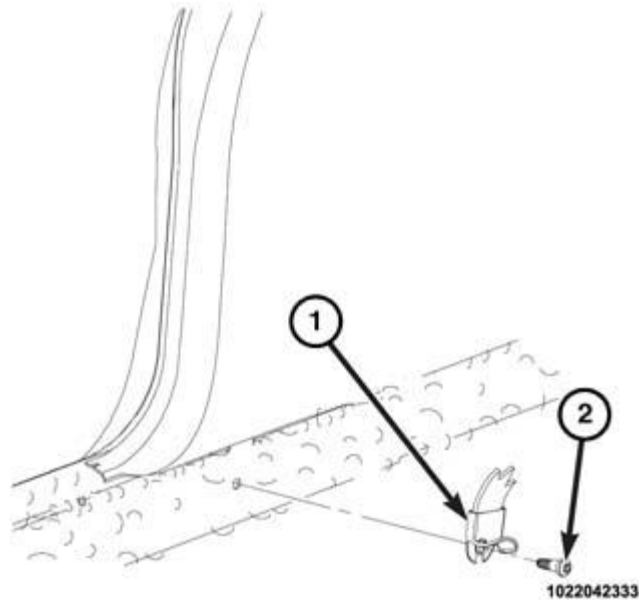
Front Seat Belt Lower Anchor Plate & Screw
